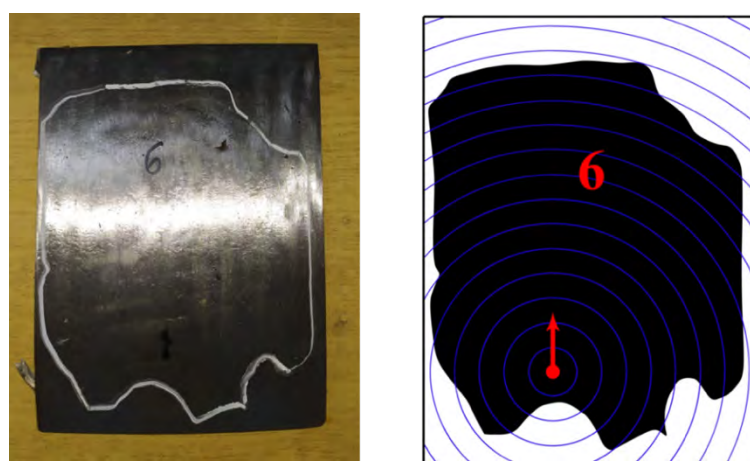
Result of explosively Al/steel welded joint testing with ultrasound defectoscopy.
